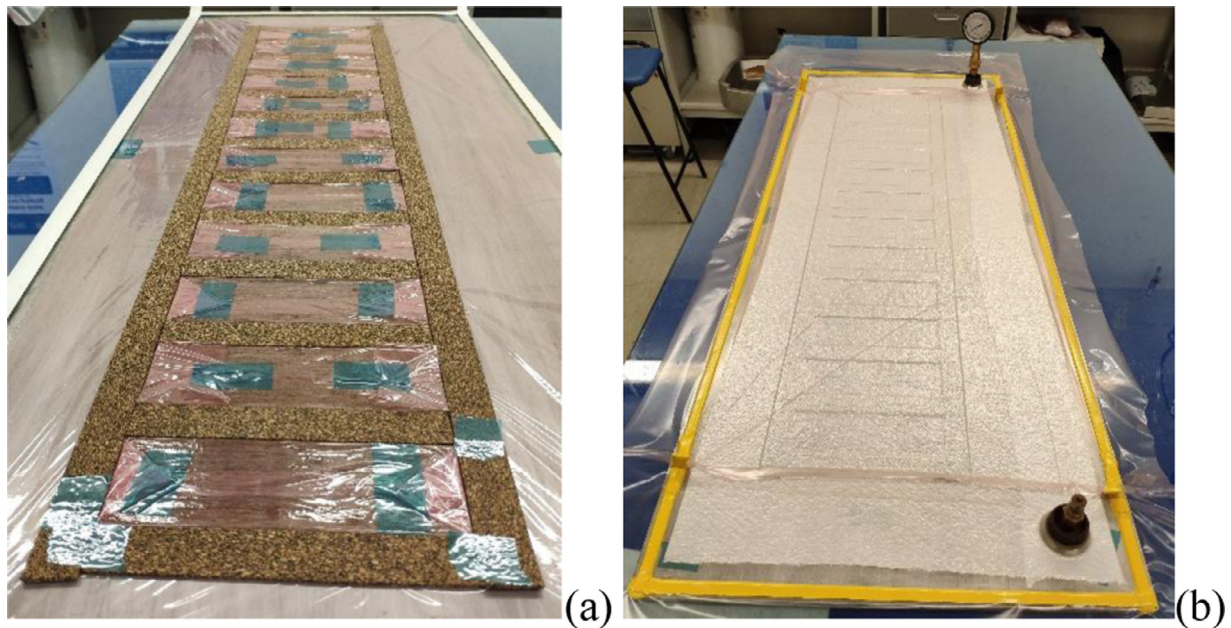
Manufacturing techniques of the skins prior to autoclave: (a) hand lay-up and (b) vacuum compaction.
